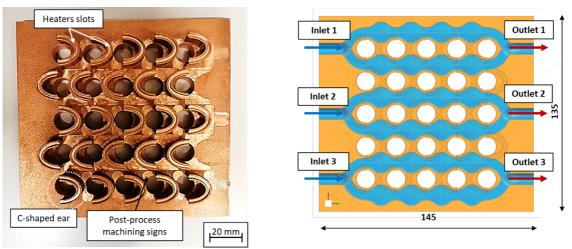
The top view of the prototype is reported. The post-process machining signs are visible because of the support removal (left); drawing of the prototype (left) [1].
